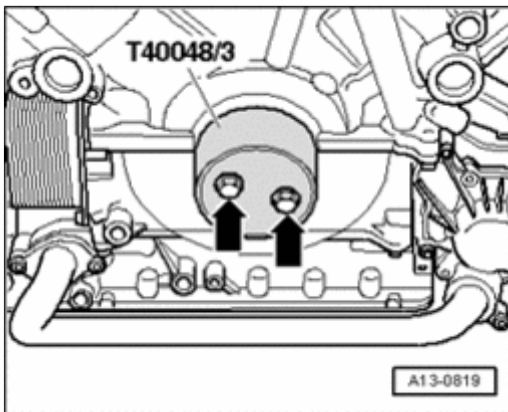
Positioning Pressure Sleeve T40048/3 With Bolts On Crankshaft
